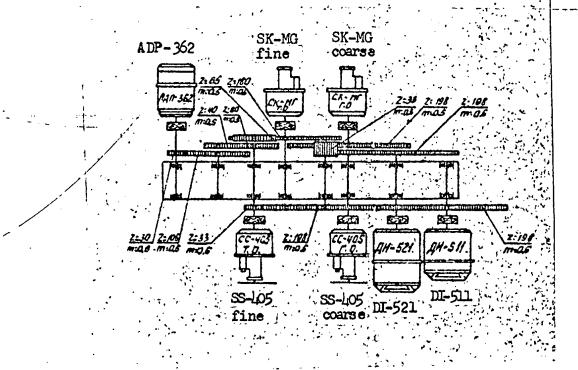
Kinematic Diagram of Reduction Gearing of Unit VD-1.
